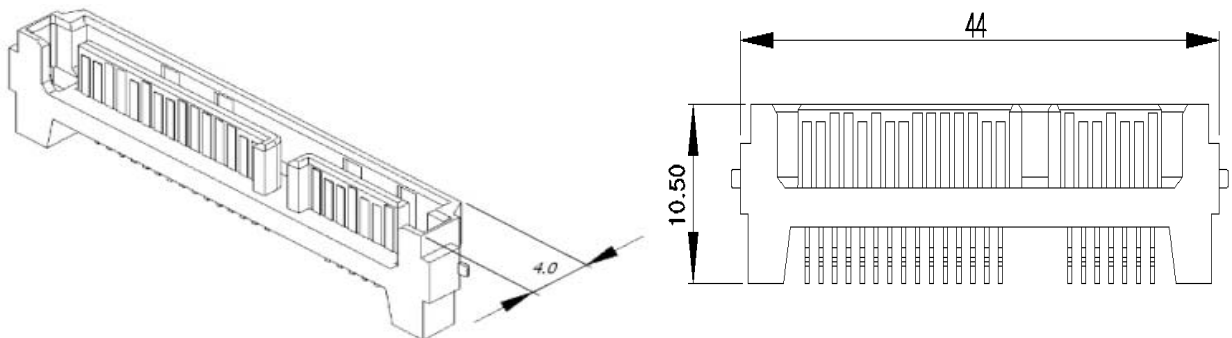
Connector Physical dimension / Connector Assembly descriptions
